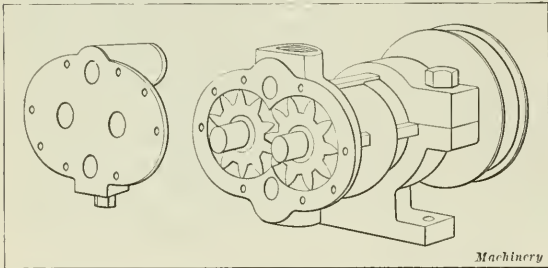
Geared Pump made by Goulds Mfg. Co., showing Arrangement of Gears
